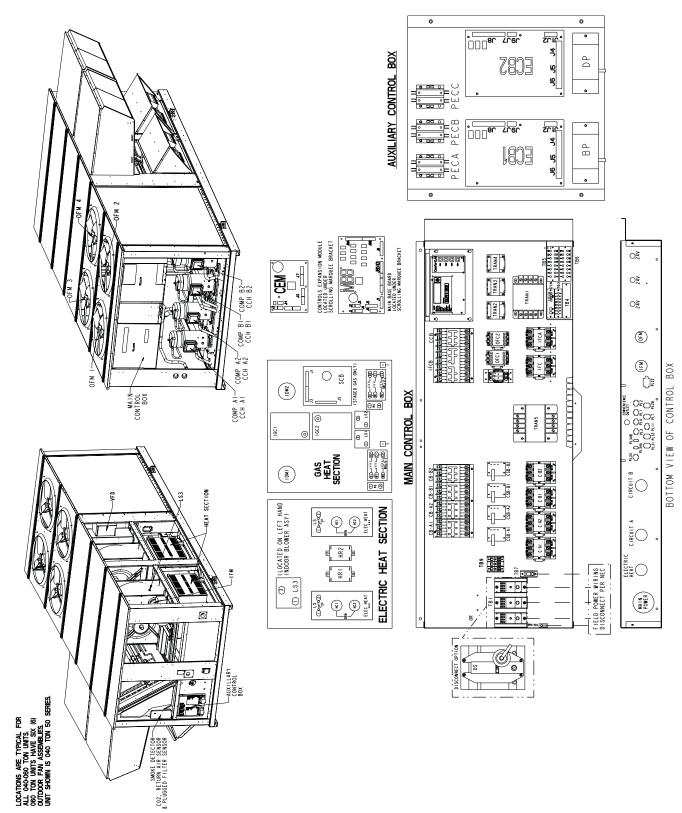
Typical Large Chassis Component Locations (Size 036-060 Units)
